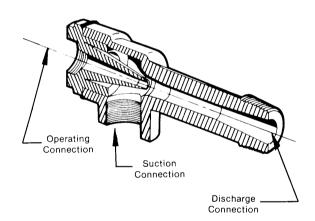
Welded Polypropylene Section Cut-Away
